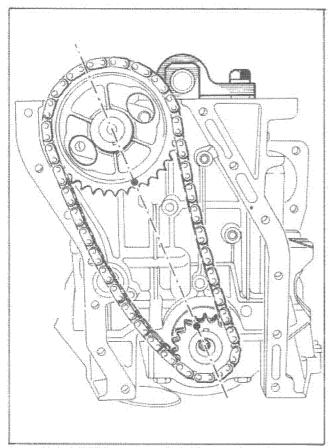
Chain sprocket alignment marks - 807/841/843 engines
